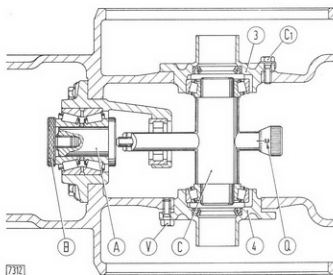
Determining Bevel Pinion Shims using Tool Part No. 290787 (A, B, C)
